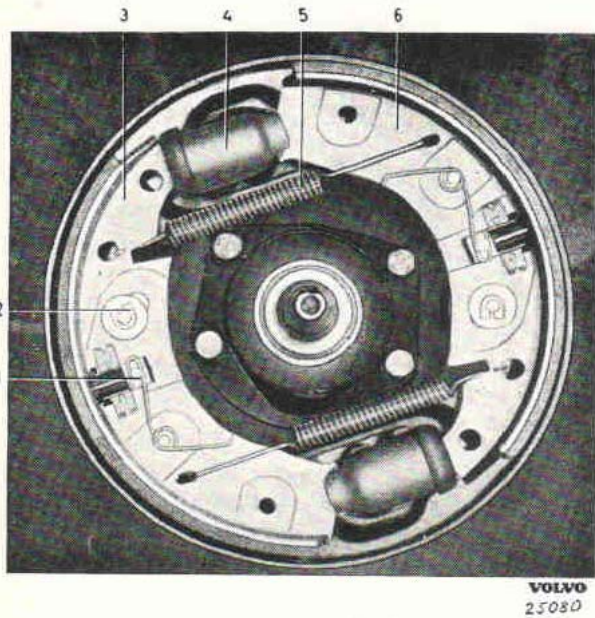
Wheel brake unit, early production, left-hand front wheel.
